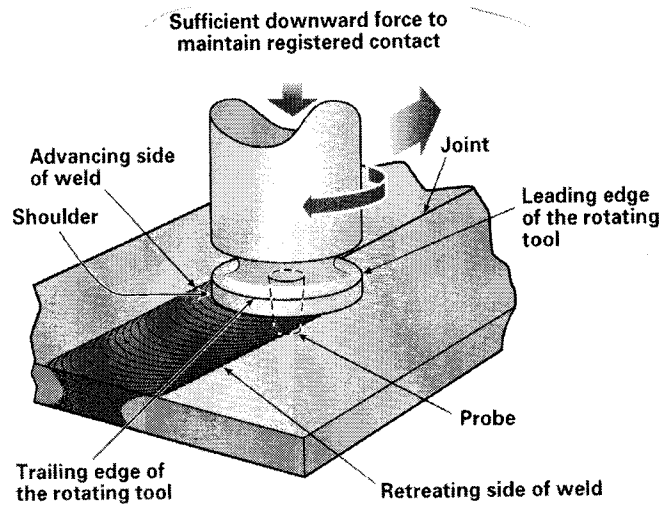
Schematic of Friction Stir Welding
